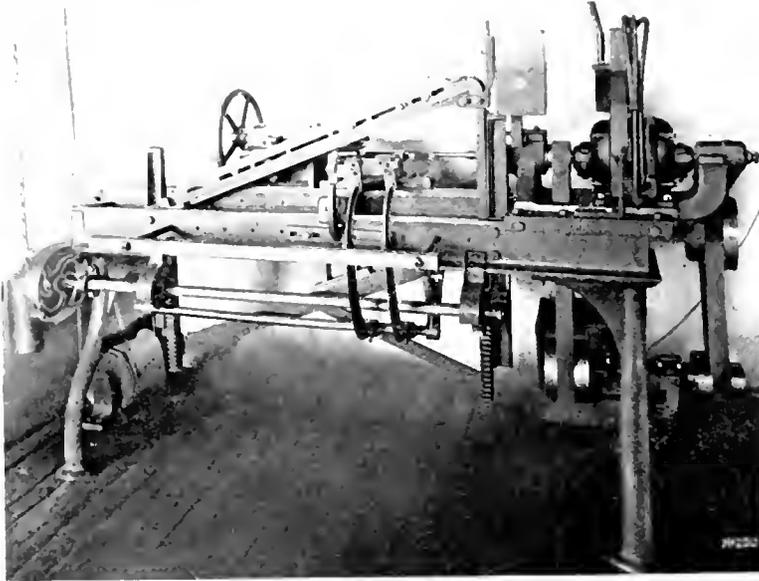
3 H P. Induction Motor mounted on Head Stock of Back Knife Gauge Lathe
